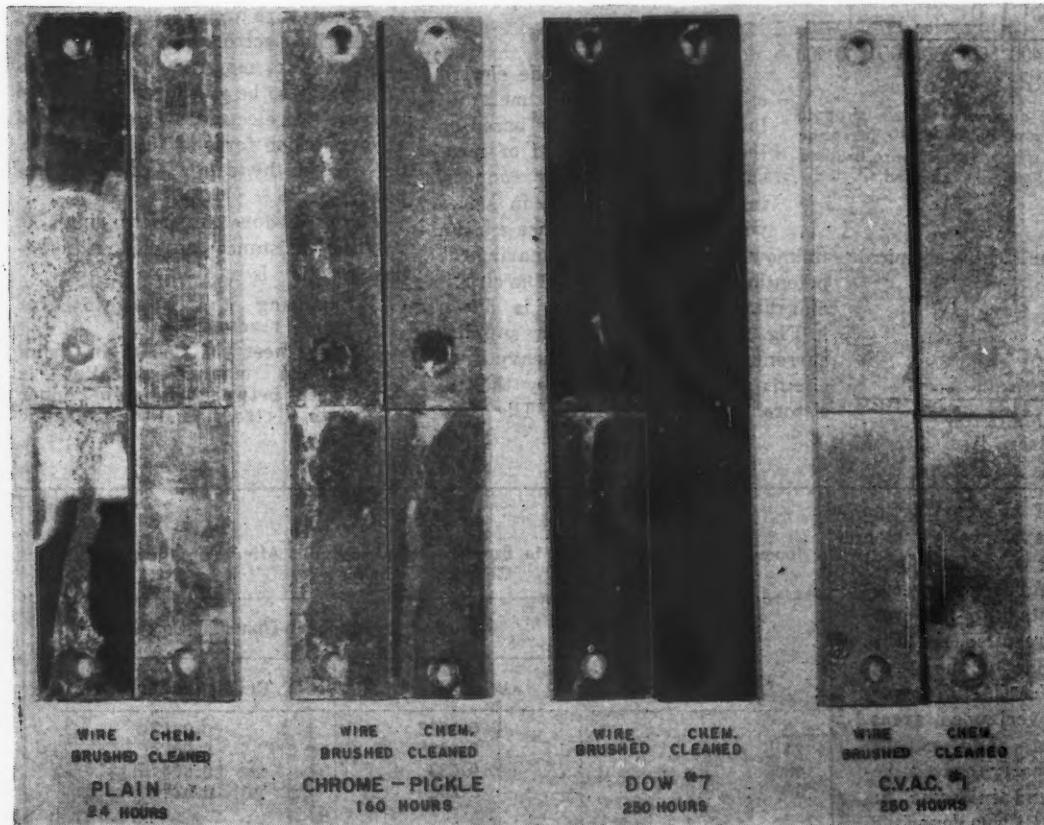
Results of salt spray corrosion tests on spot welded specimens of AMC52S-H magnesium alloy.
